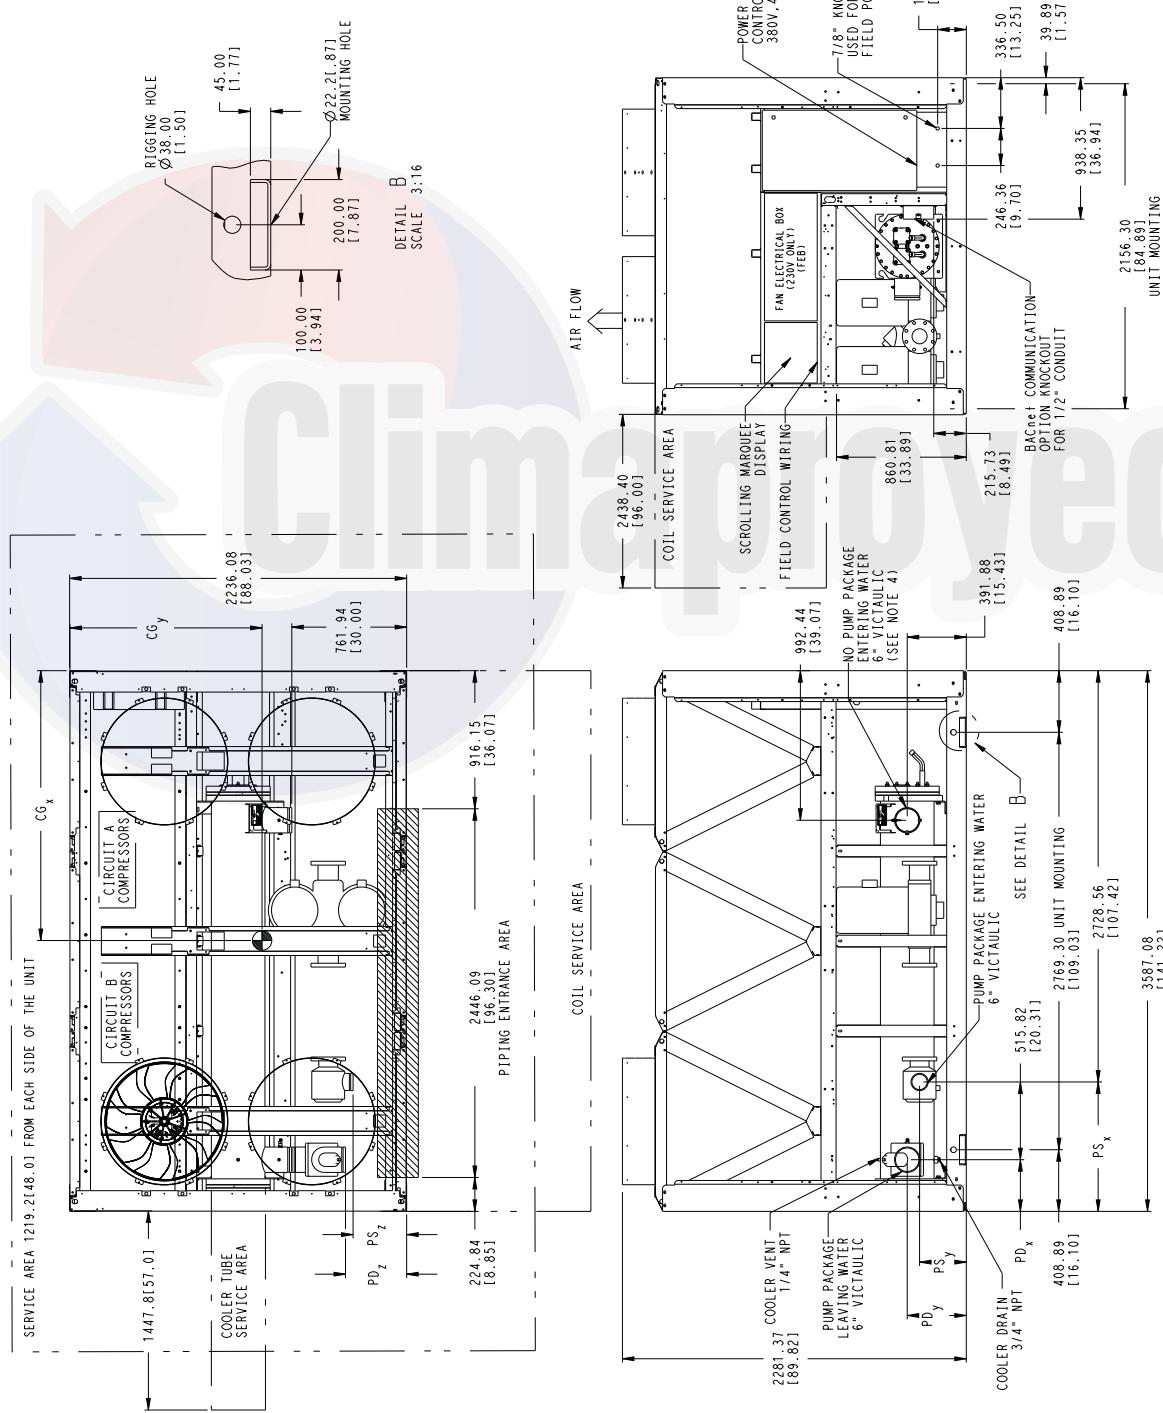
30RB090, 100 Air-Cooled Chiller Dimensions
